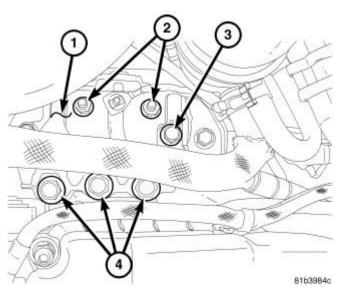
Right Exhaust Manifold Heat Shield & Bolts Courtesy of CHRYSLER GROUP, LLC
